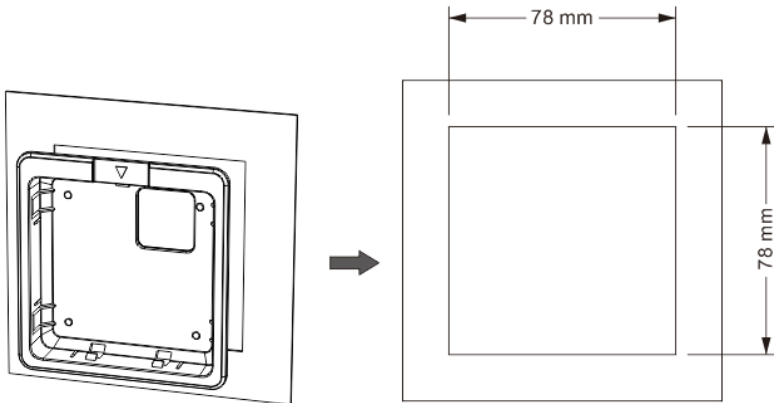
Installation Dimensions of Single Display External Keyboard Bracket (mm)
